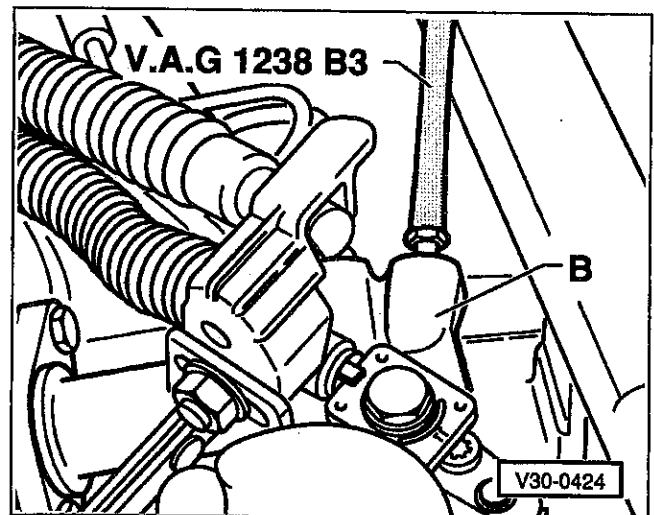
Bleeder hose shown connected to bleeder valve on slave cylinder (B).
